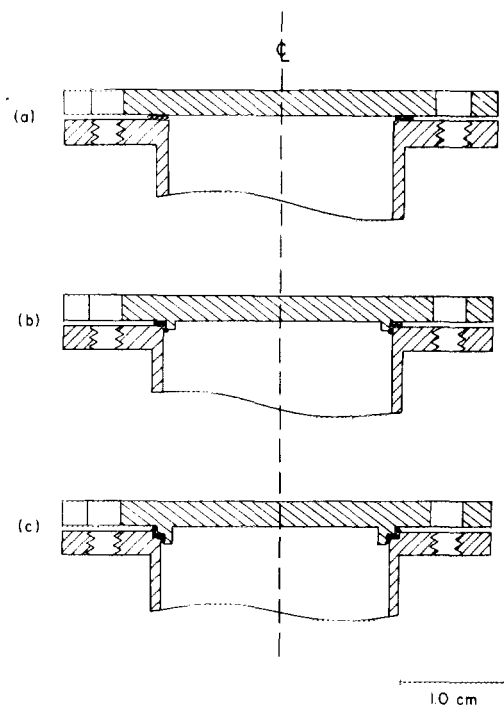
Examples of the three types of indium O-ring flange seals. (a) The untrapped O-ring seal, (b) the partially trapped O-ring seal, and (c) the fully trapped O-ring seal. Note: The thickness of the indium gasket in all the figures in this article is greatly exaggerated for the sake of clarity.
